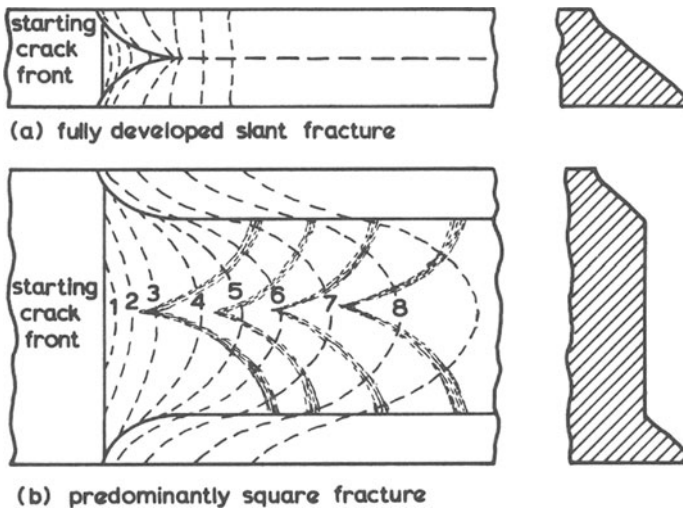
Schematic representations of the advancement of the crack front in (a) a thin specimen which shows a slant fracture and (b) a thicker specimen which shows both slant and square fracture. In the latter case, the square portion advances fastest and leads to the formation of the characteristic chevron markings, which are also illustrated (after Srawley and Brown³⁴).
